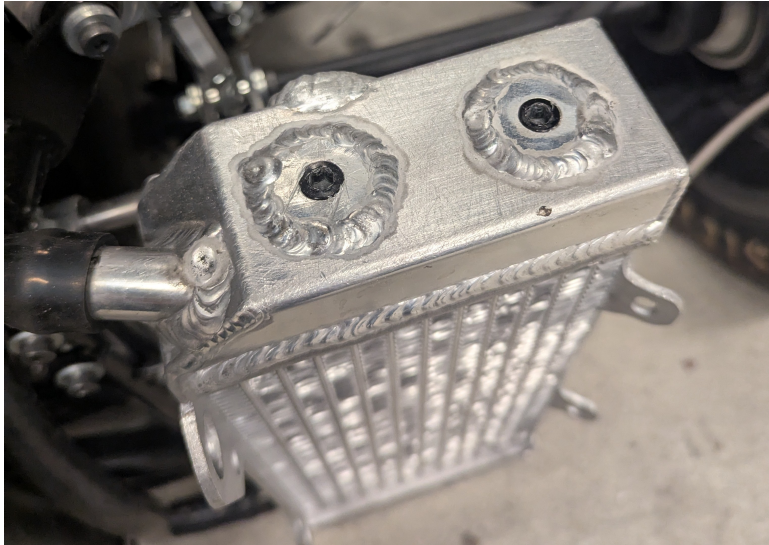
UCR-02 Radiator Bungs, Welded in and Plugged
